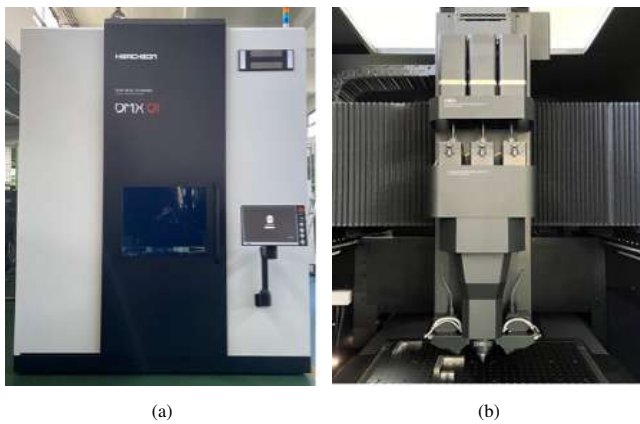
DLMF process (Hwacheon Machinery Co., Ltd): (a) DMX 01 Metal 3D printer, and (b) DMX 01 deposition head
